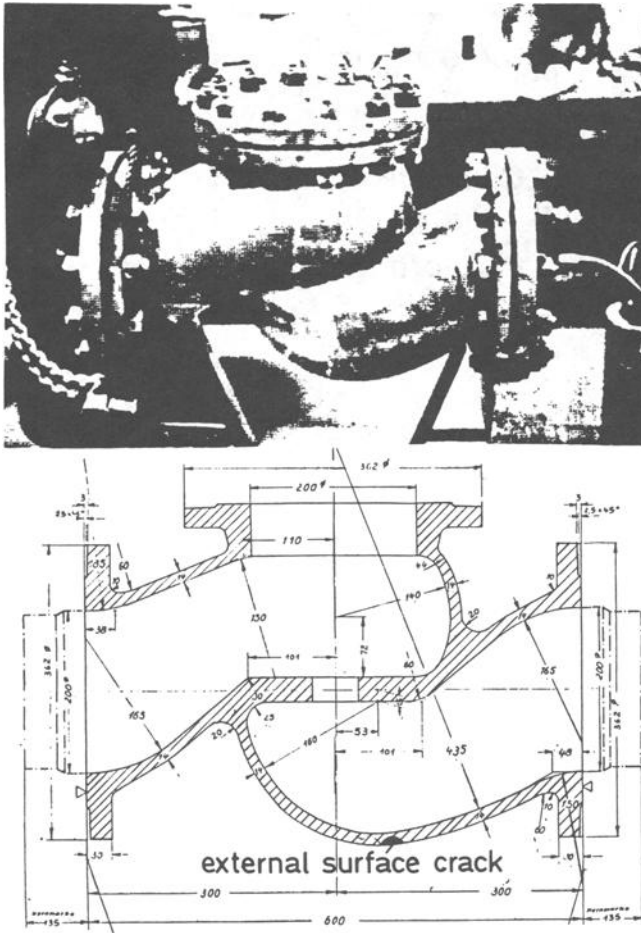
Valve casing (wall thickness 12.5 mm) of cast steel, with an external surface crack and modeling of the cracked part of it (encircled) [12].
